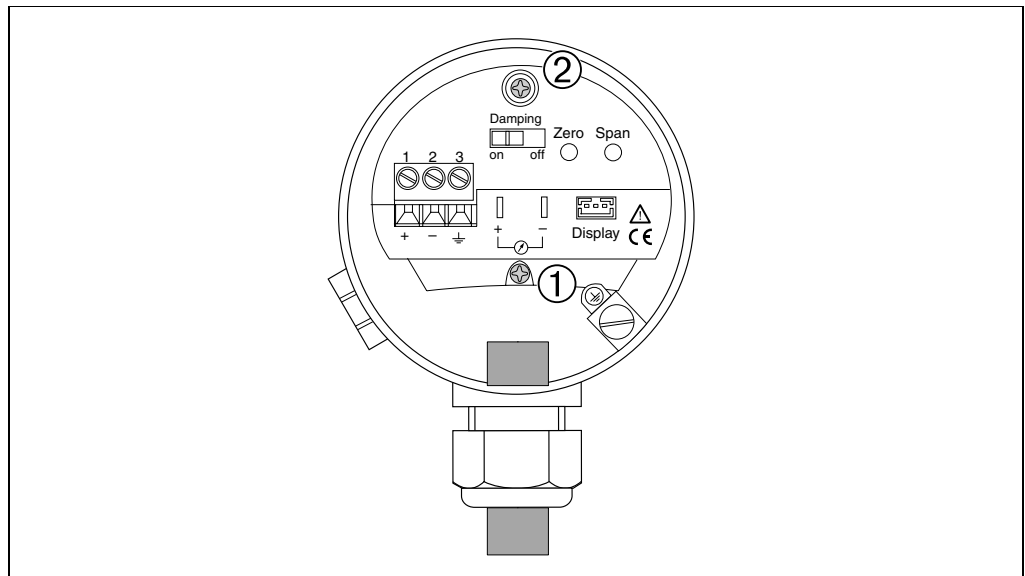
Position of screws ① and ② for removing the electronic insert
